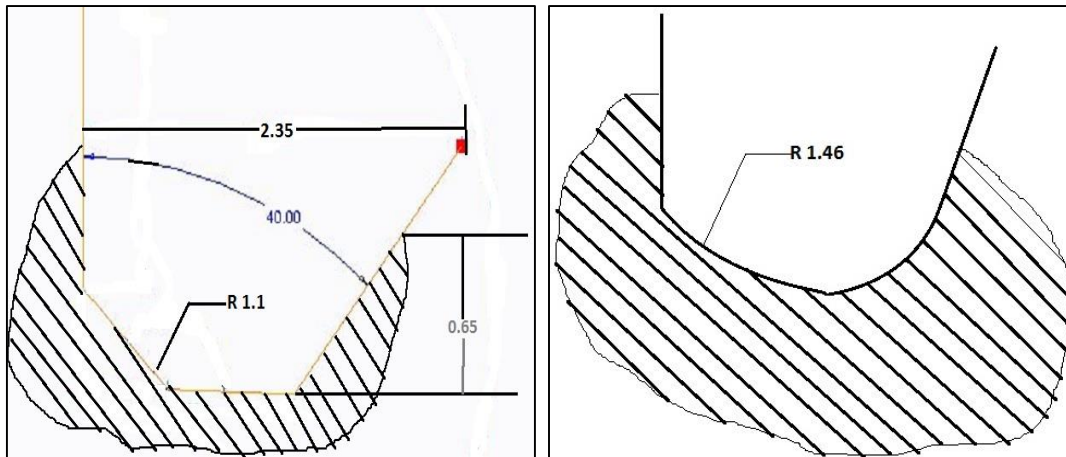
Existing groove design near main journal fillet (left) semi elliptical groove design near main journal (right)
